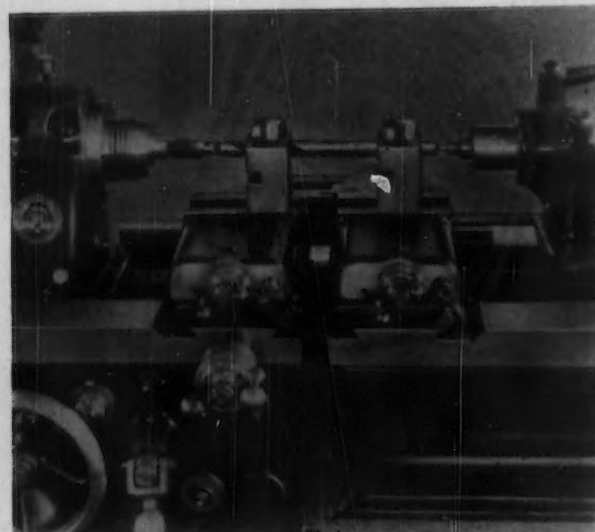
An automatic reversing mechanism can be employed with double carriage set-ups such as turning both taper and straight sections on drill blanks.
